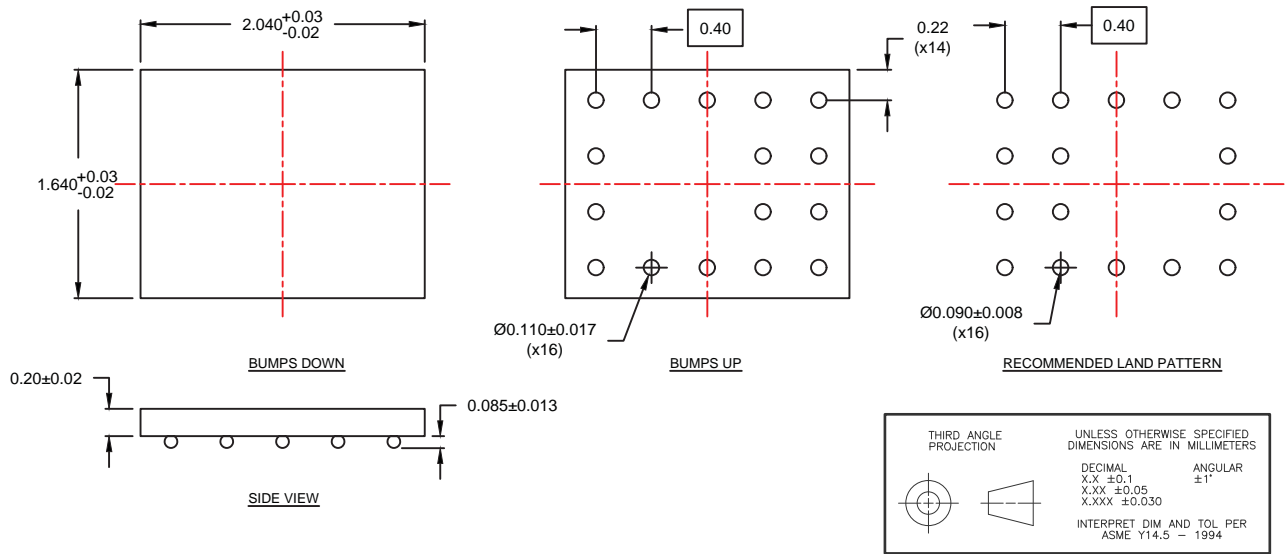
• Pin Layout for PE29102⁽¹⁾⁽²⁾
